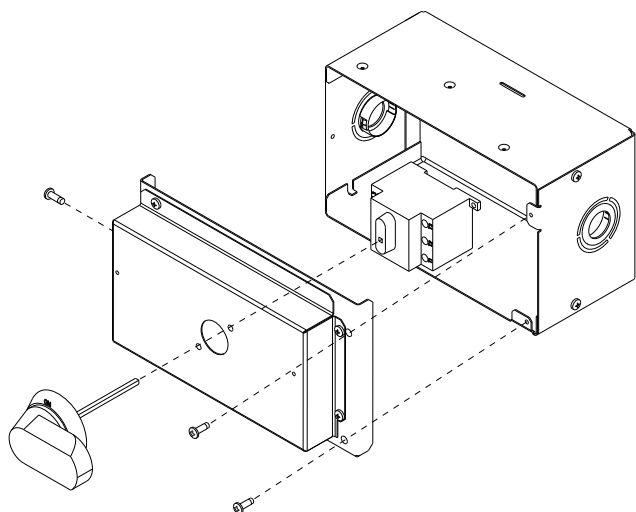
48WE*H07 NFD Handle and Shaft Assembly
